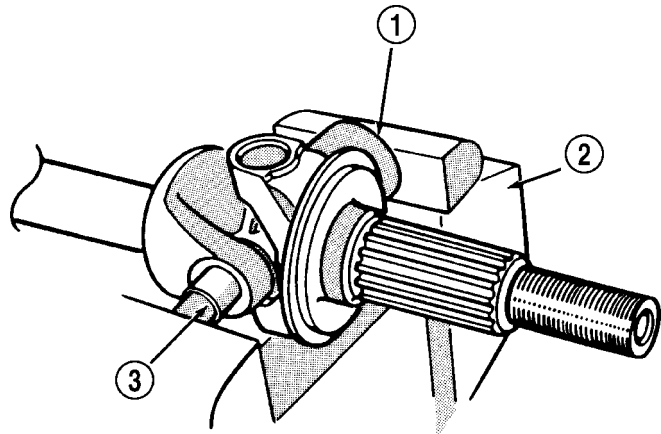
AXLE SHAFT OUTER U-JOINT
